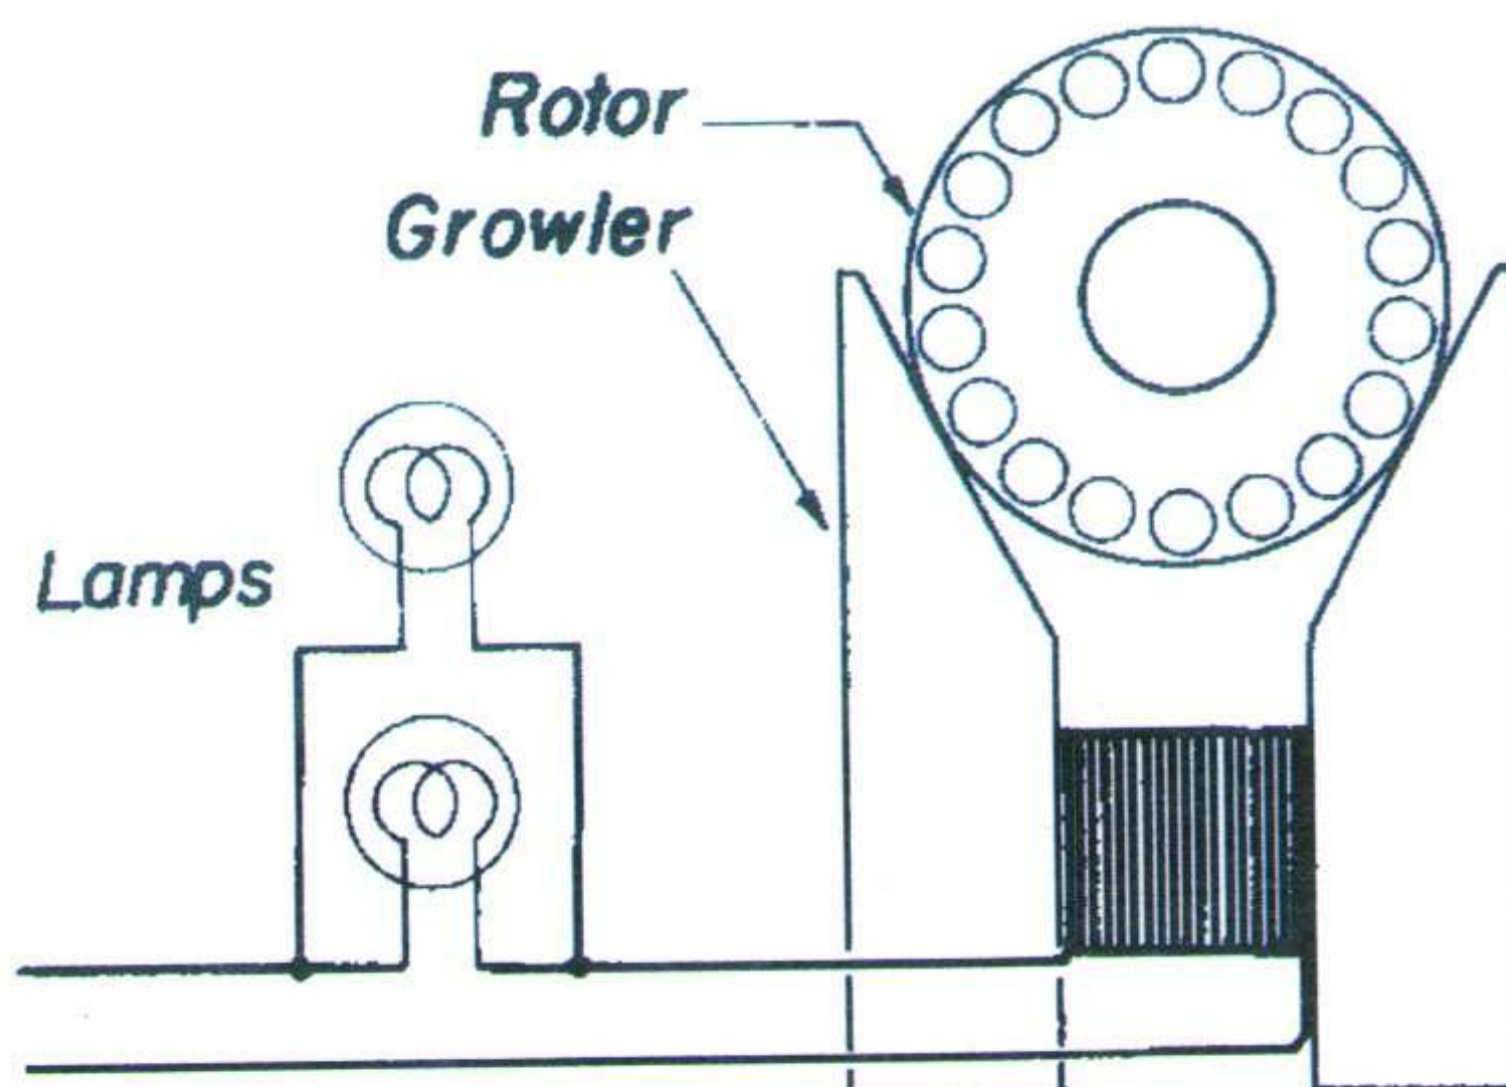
The rotor under test placed between the open ends of the growler core.
